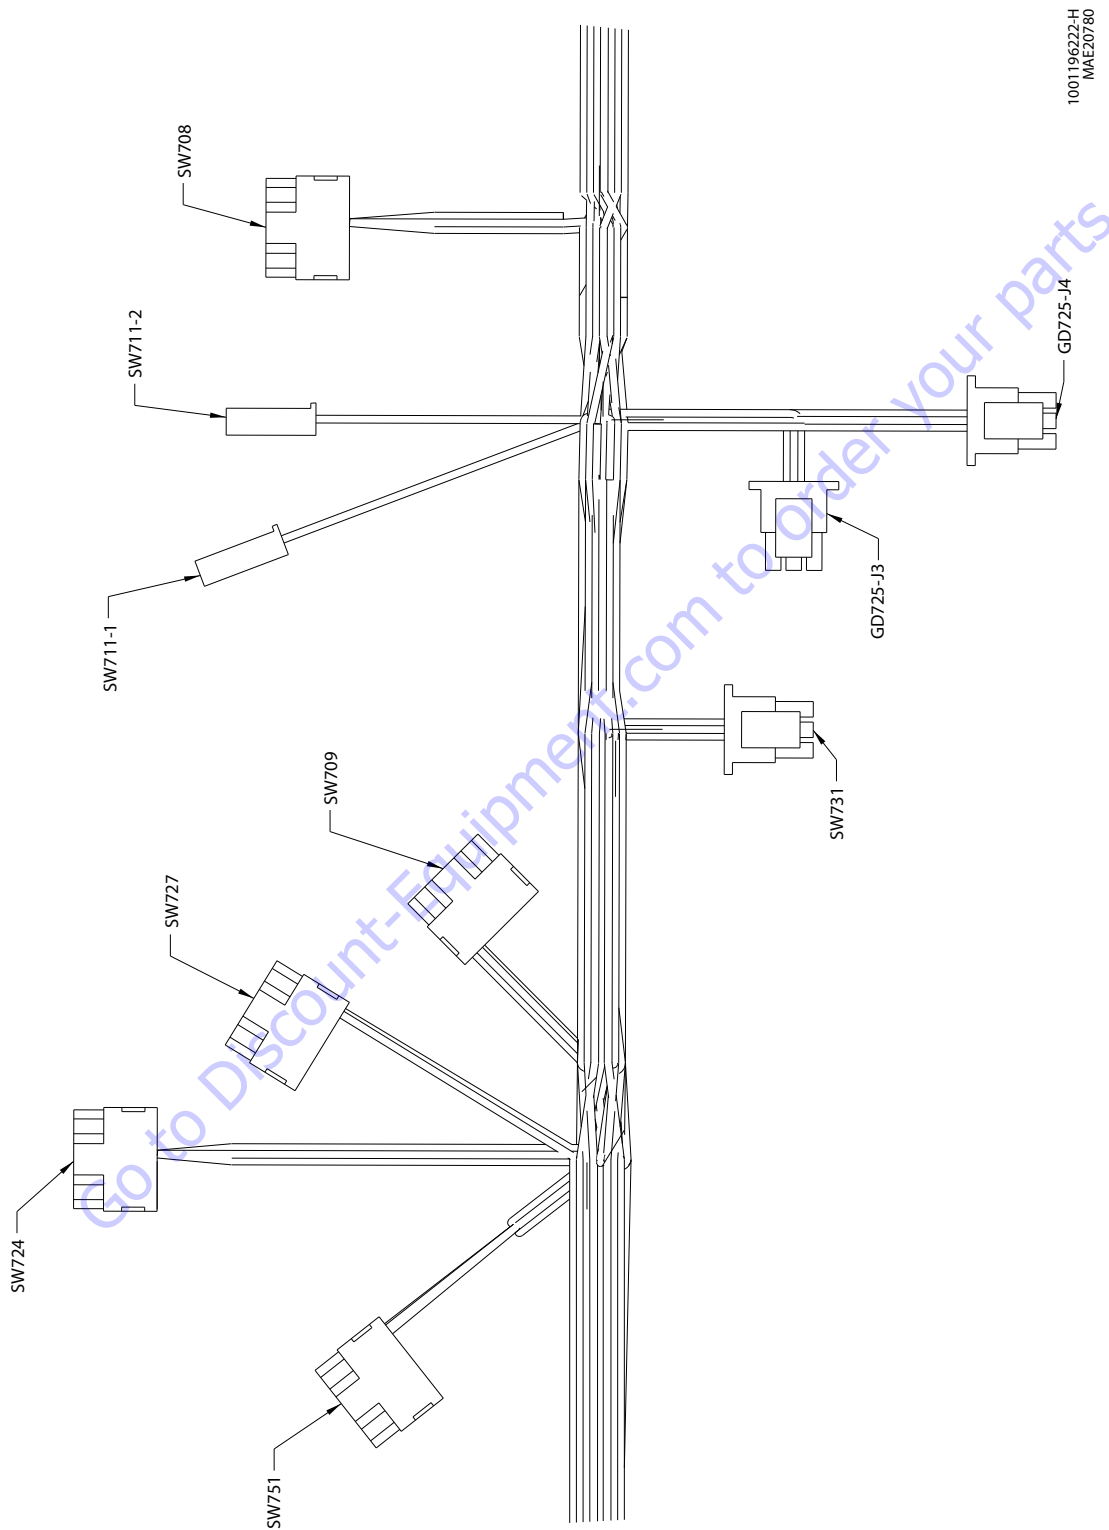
Platform Box Harness - Sheet 4 of 6
